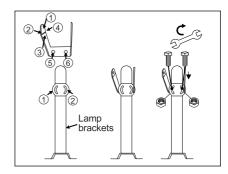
Connect the assembled solar panel support in Figure 1 and Figure 2 to the U-shaped bracket. First use 2 Phillips screws to fix the No. 1 holes on both sides of the solar panel bracket to the No. 1 holes on both sides of the U-shaped bracket, then adjust the angle of the solar panel, and then use 2 Phillips screws to lock the solar panel bracket and the U-shaped bracket respectively. One of the 2/3/4 angle holes.
